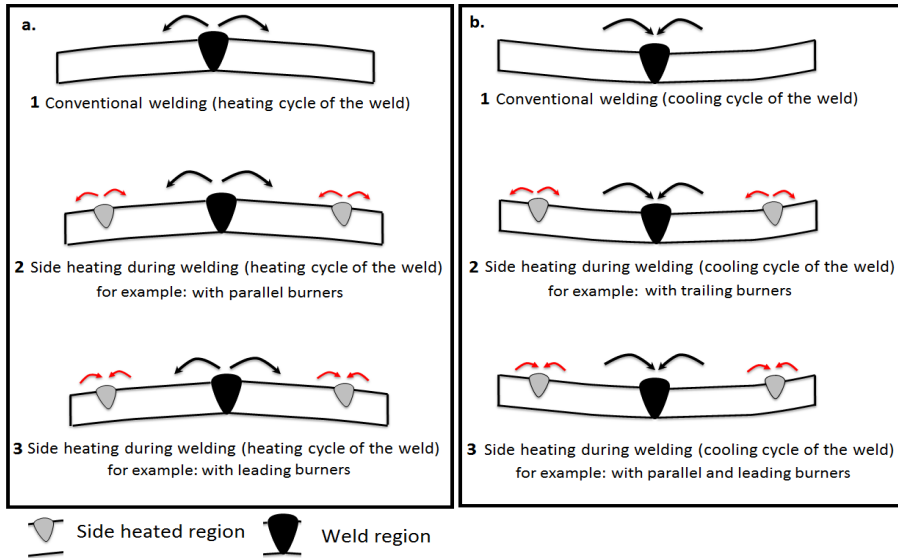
The rotations of the weld and the heated zones during conventional welding and welding with side heating for (a) weld heating and (b) weld cooling cycles.
